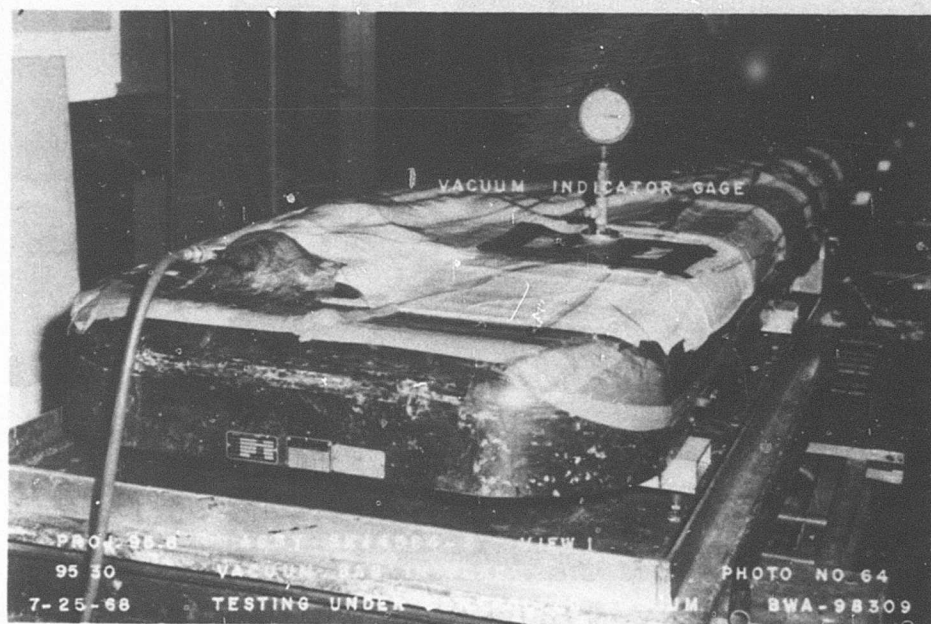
Blade Assembly in Vacuum Bag for Cure of Outer Skins.
